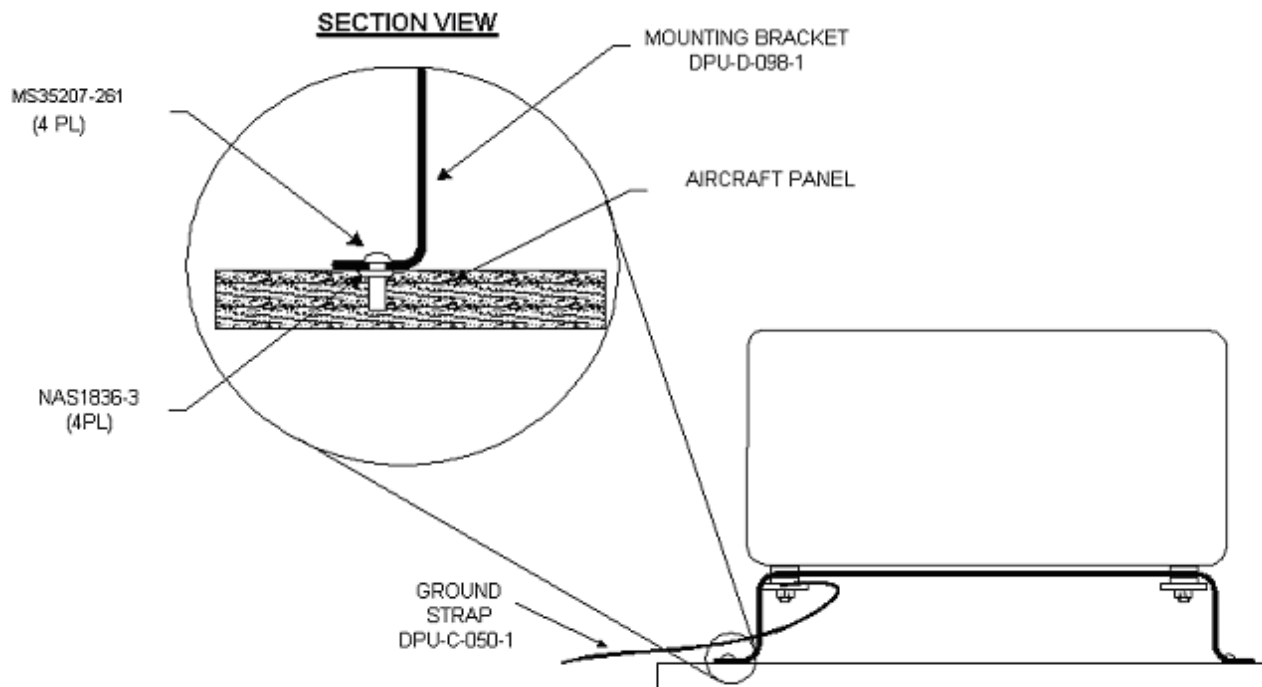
Stand Alone Bracket (DPU-D-098-1) to Honeycomb/Sandwich Panel (Side View)
